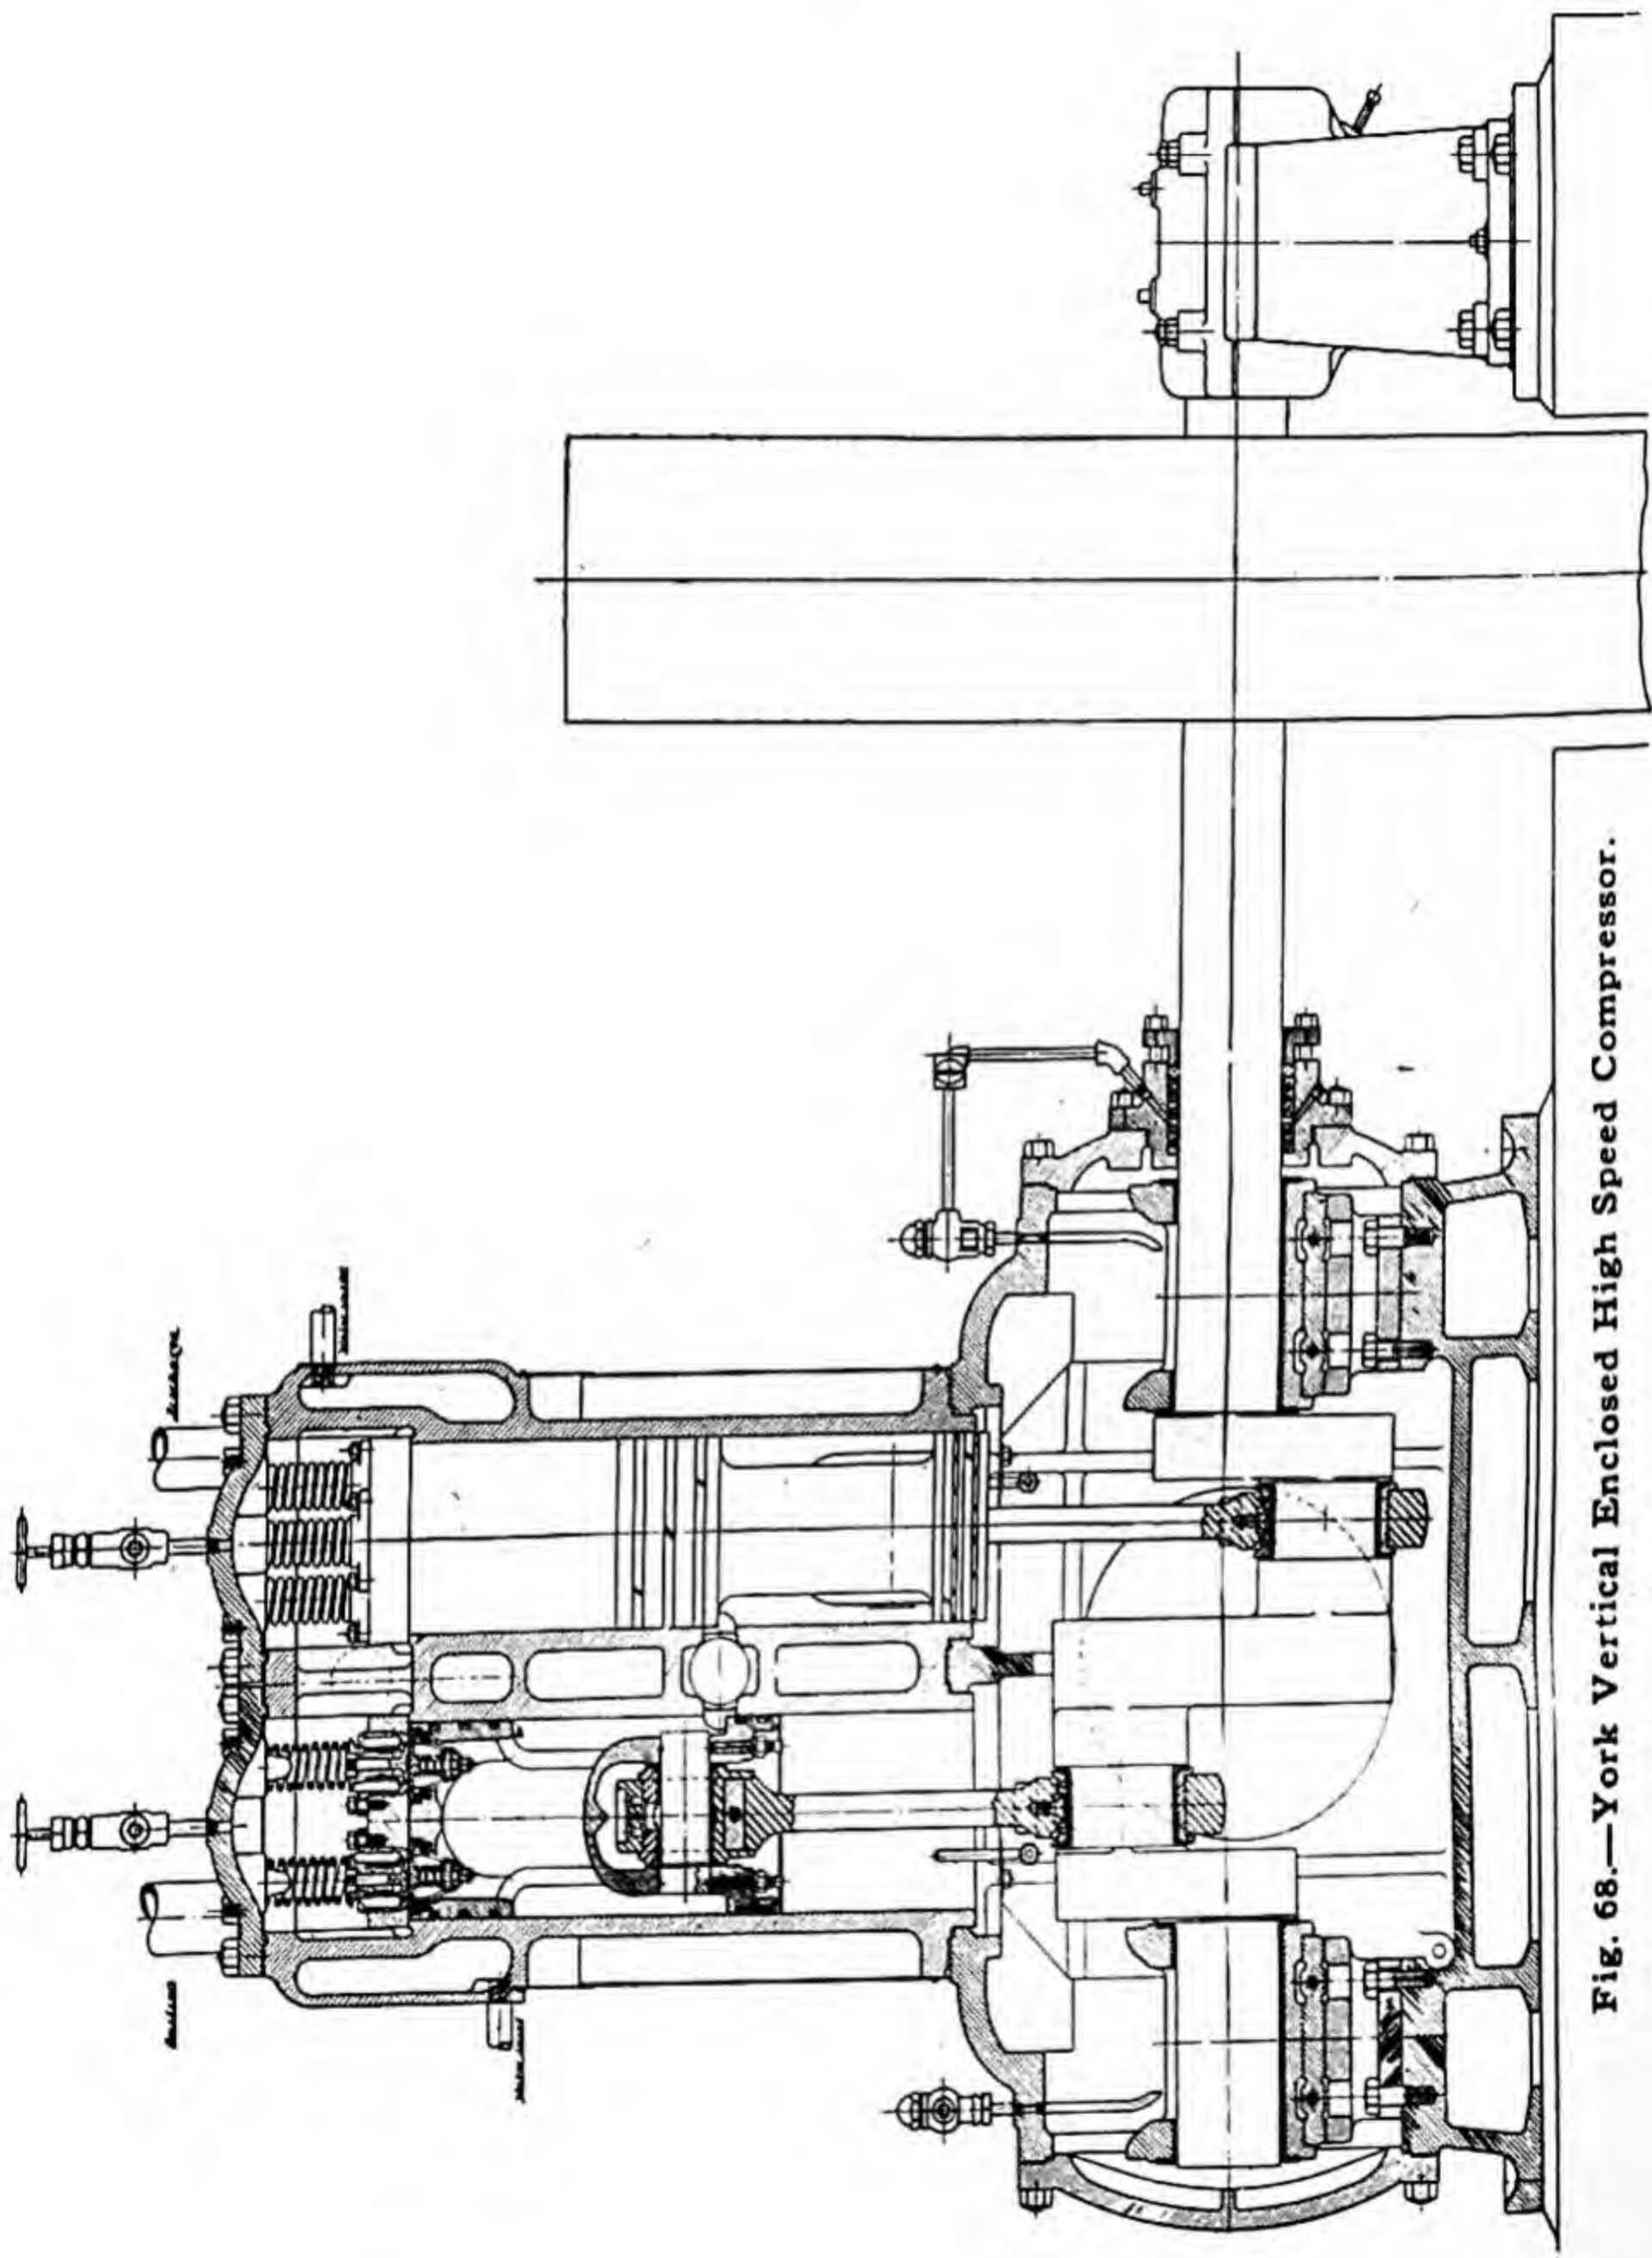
York Vertical Enclosed High Speed Compressor.
